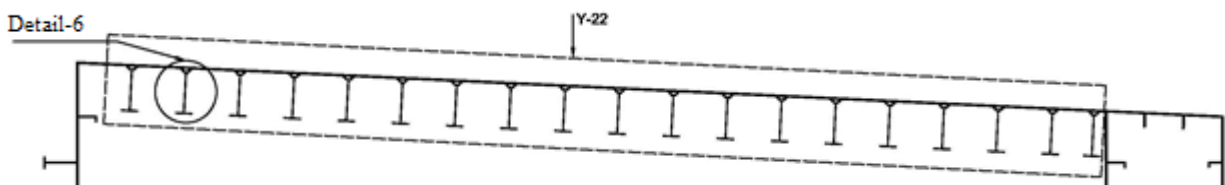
Deck structure with Y-stiffener after every two bulb plate stiffeners
